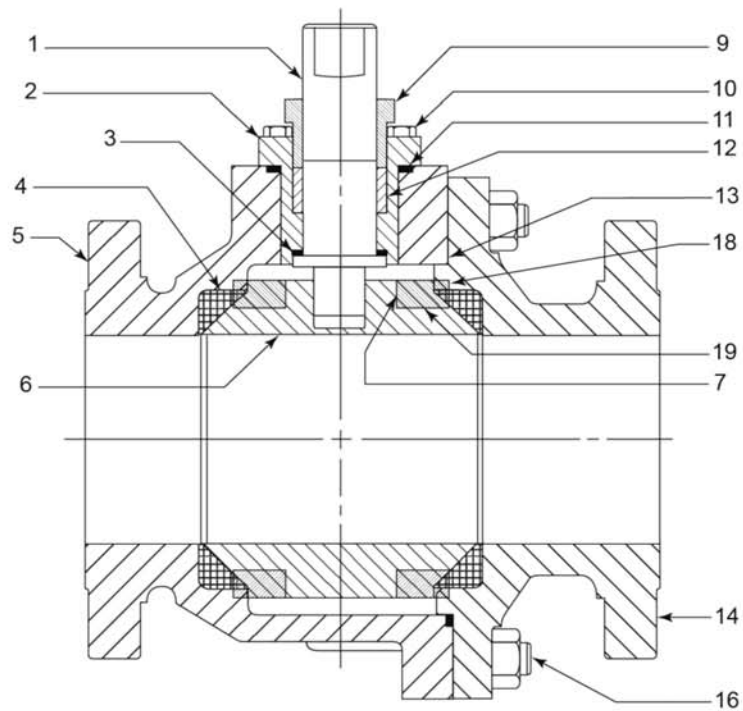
Typical Floating Ball Valve Components (One-piece Body/Unibody Illustrated)—
